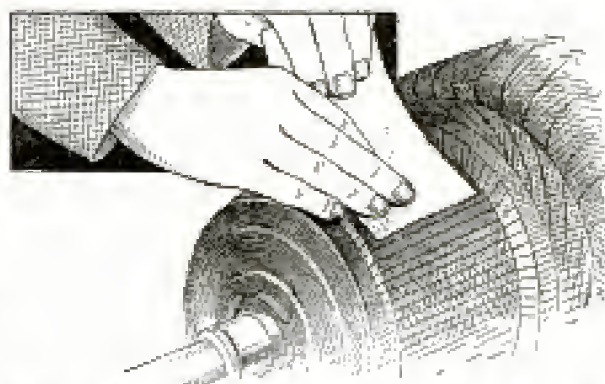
Smoothing a Commutator with a Piece of Sandpaper Backed with a Piece of Heavy Cloth
